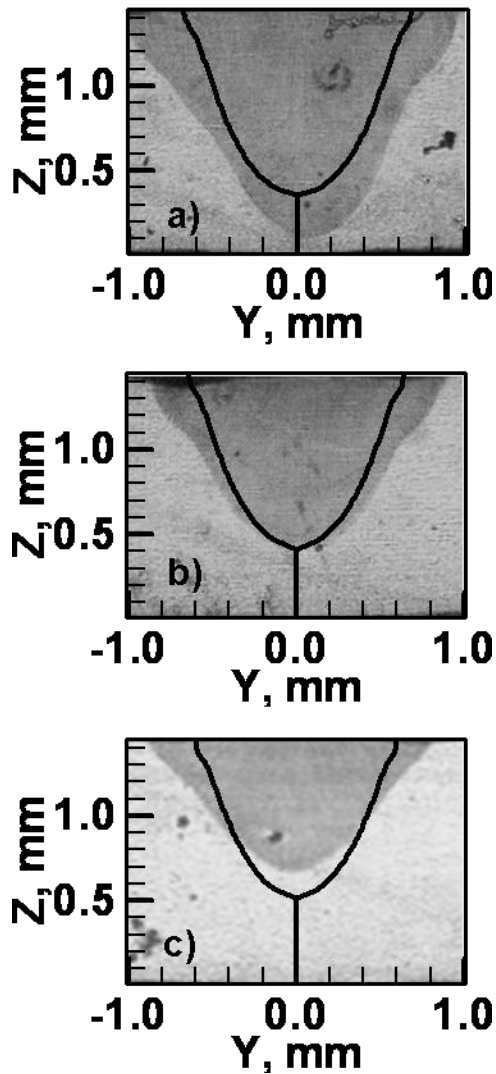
Comparison of weld pool cross-section with simulated weld pool cross-section for Al 5754 alloy for laser power of 2600 W and welding velocity a) 74.1 mm/s b) 84.7 mm/s and c) 10.6 mm/s.
